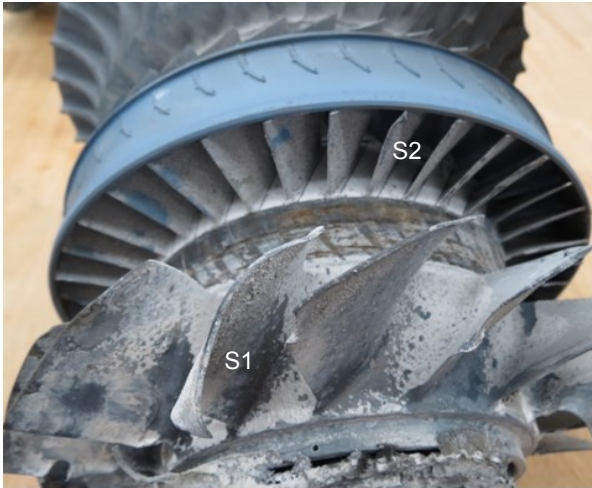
S1 and S2 compressor blades (viewed from forward of engine looking aft)
